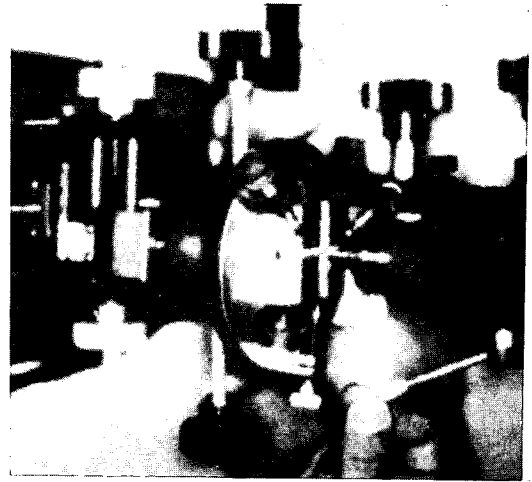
B Figure of PANAFIX after mounting the metal mold.
